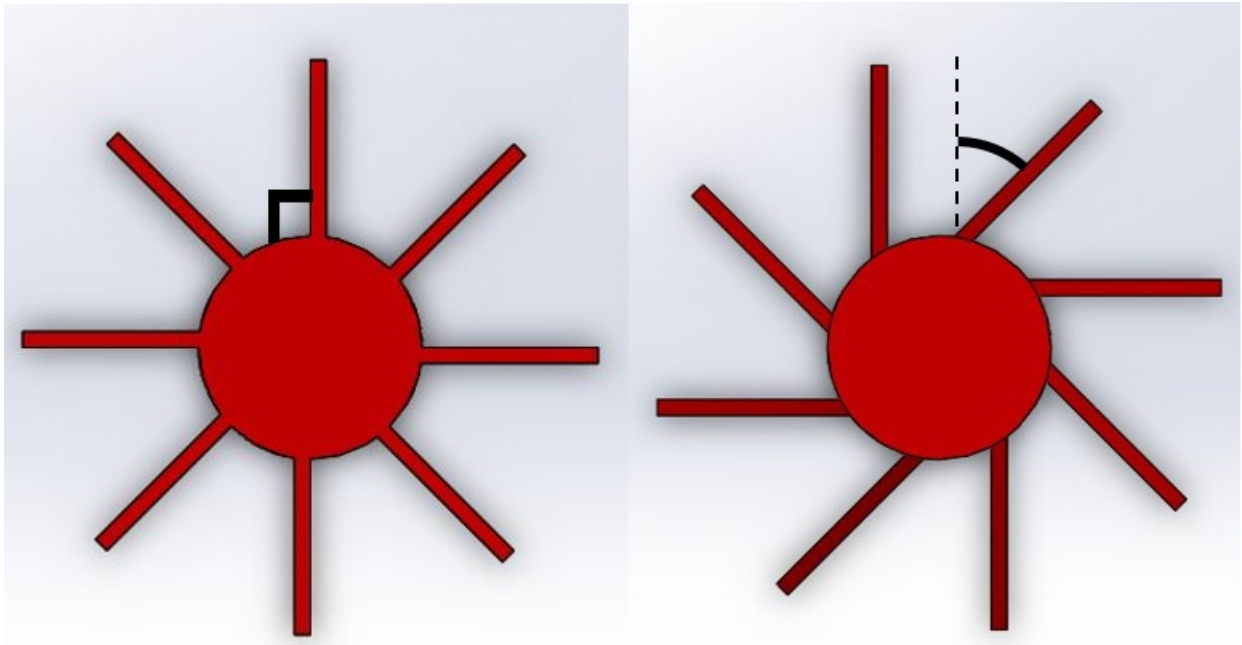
Left: Front face of the (0,0) geometry. Right: Front face of the (45,70) geometry.
